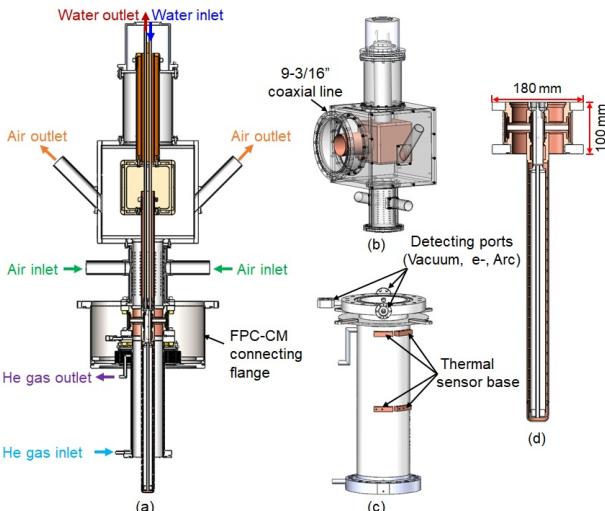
Layout of the coupler assembly (a) and its main components: T-box (b), coaxial section (c), RF window (d).
